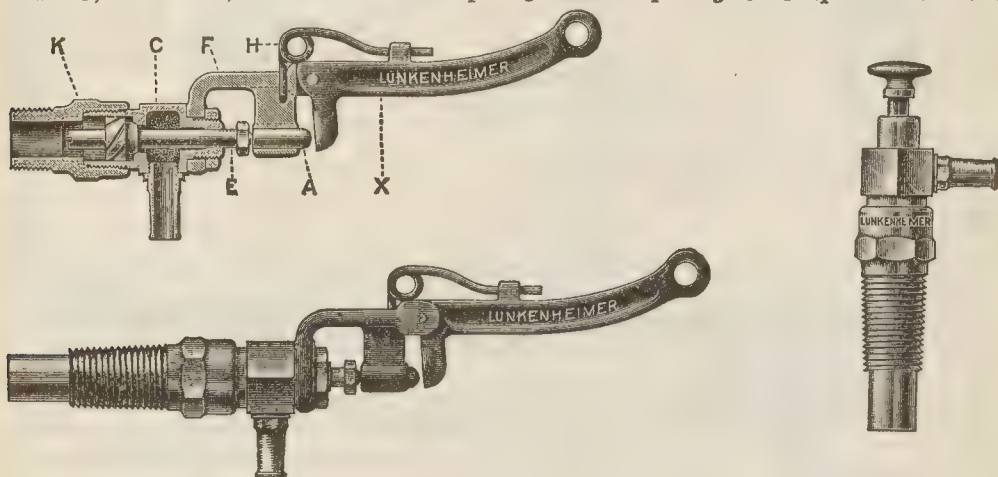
,123.—*Spring* cock; long shank push button or "Mississippi" pattern.
